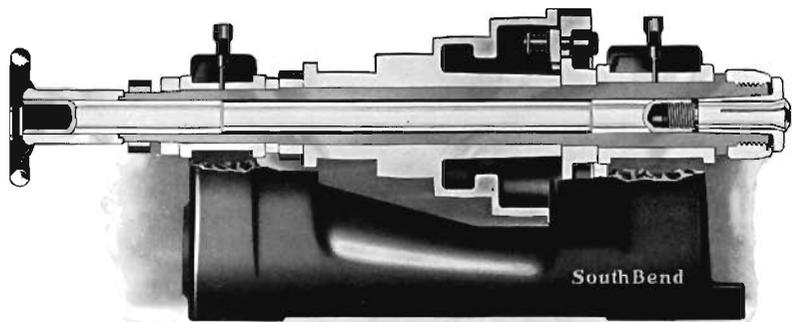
Cross Section View of Headstock Used on 13", 15", and 16" Lathes. Note Application of Draw-in Collet Chuck Attachment.
